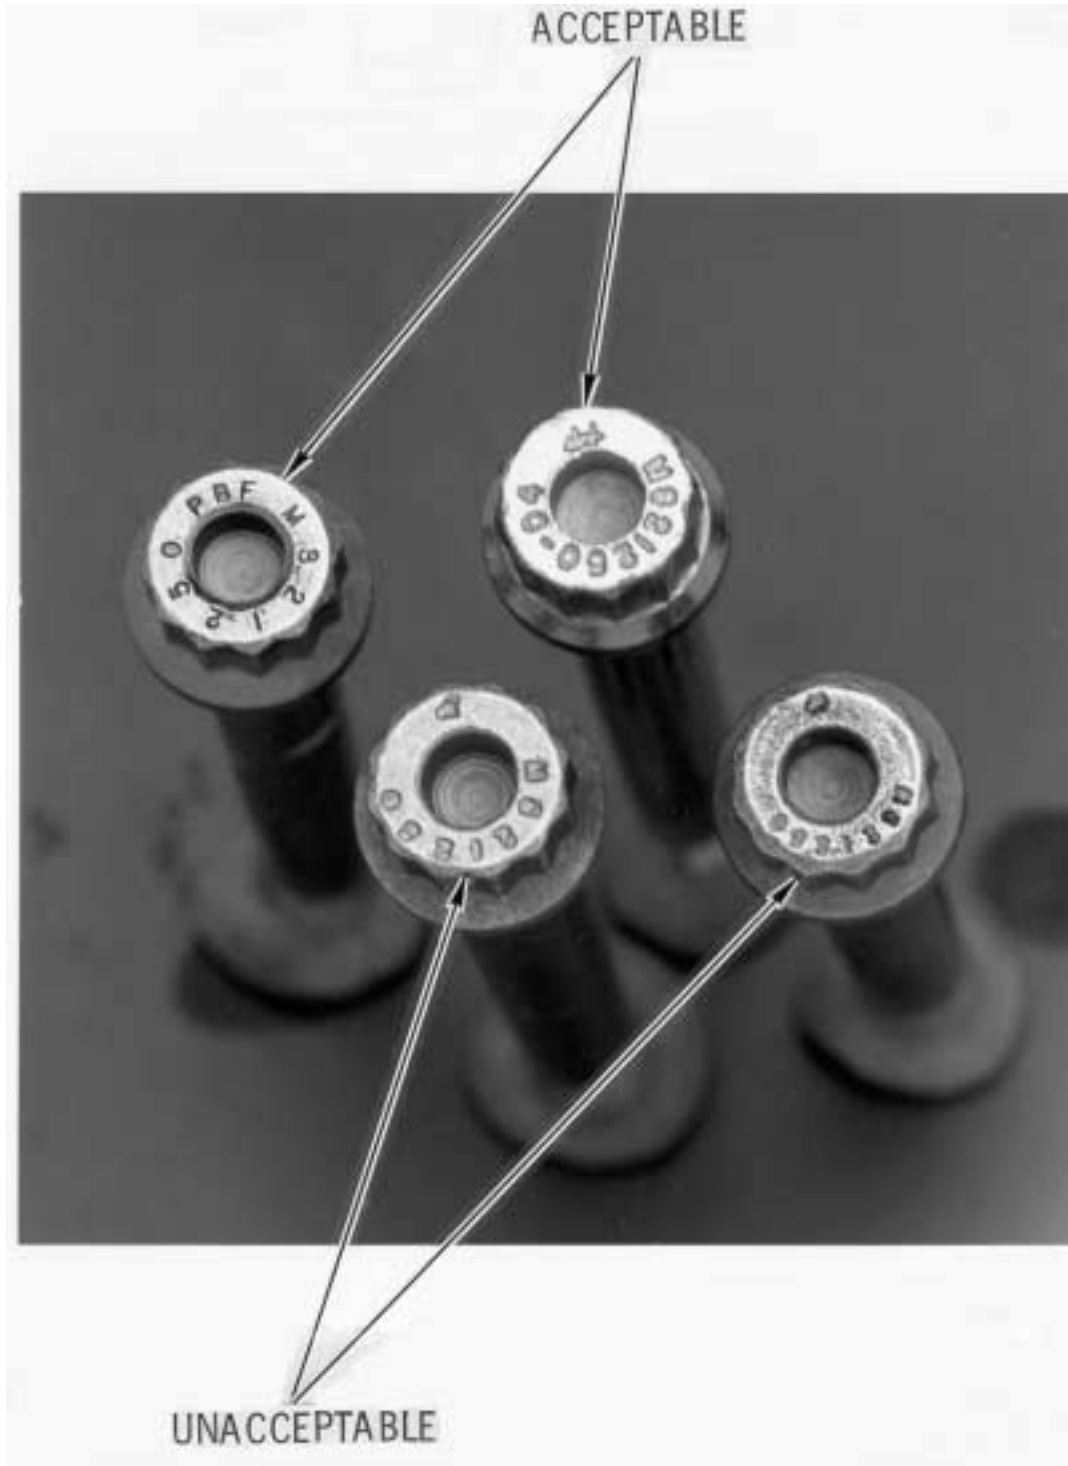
Inspection/Replacement of Main Transmission Output Driveshaft Bearing Assembly Bolts
